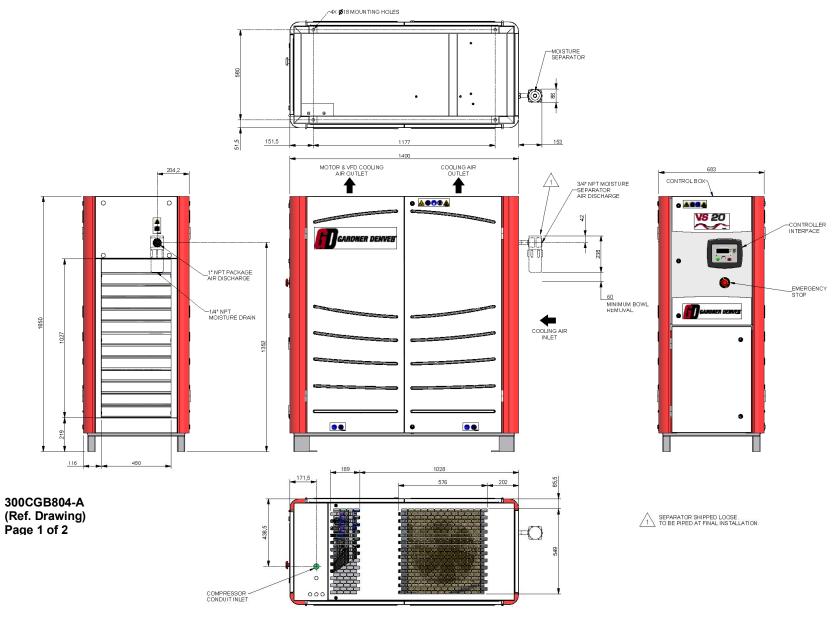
PACKAGE ILLUSTRATION (AIR-COOLED) – External Details
